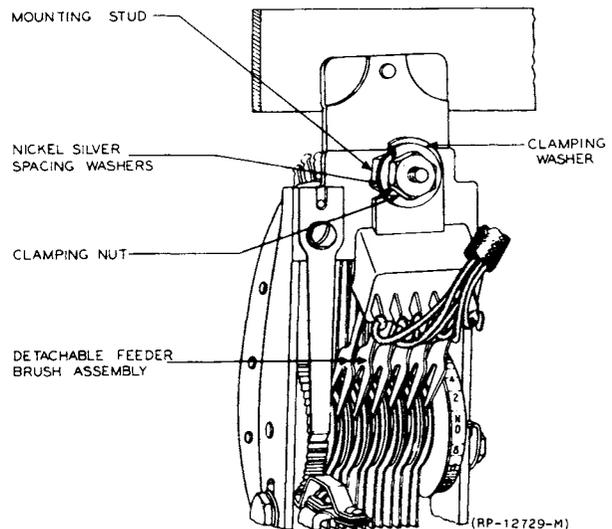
SELECTOR EQUIPPED WITH DETACHABLE FEEDER BRUSH UNIT
